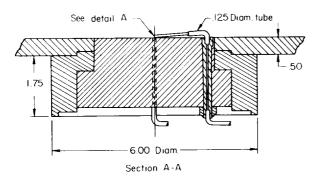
Details of the Preston surface-shear tubes. 509374—59——2
